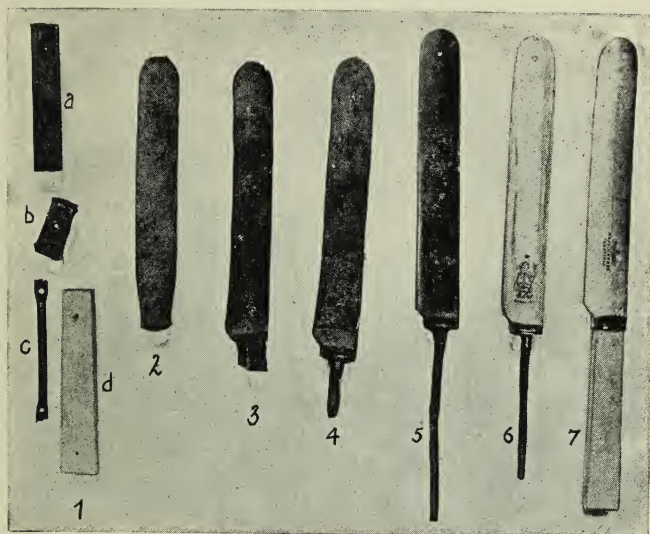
The stages through which a Knife passes. 1. *a*, Blade in rough; *b*, bolster; *c*, tang; *d*, haft. 2. Blade forged. 3. Bolster welded on. 4. Bolster drawn out. 5. Tang welded on. 6. Blade ground. 7. Finished knife.
